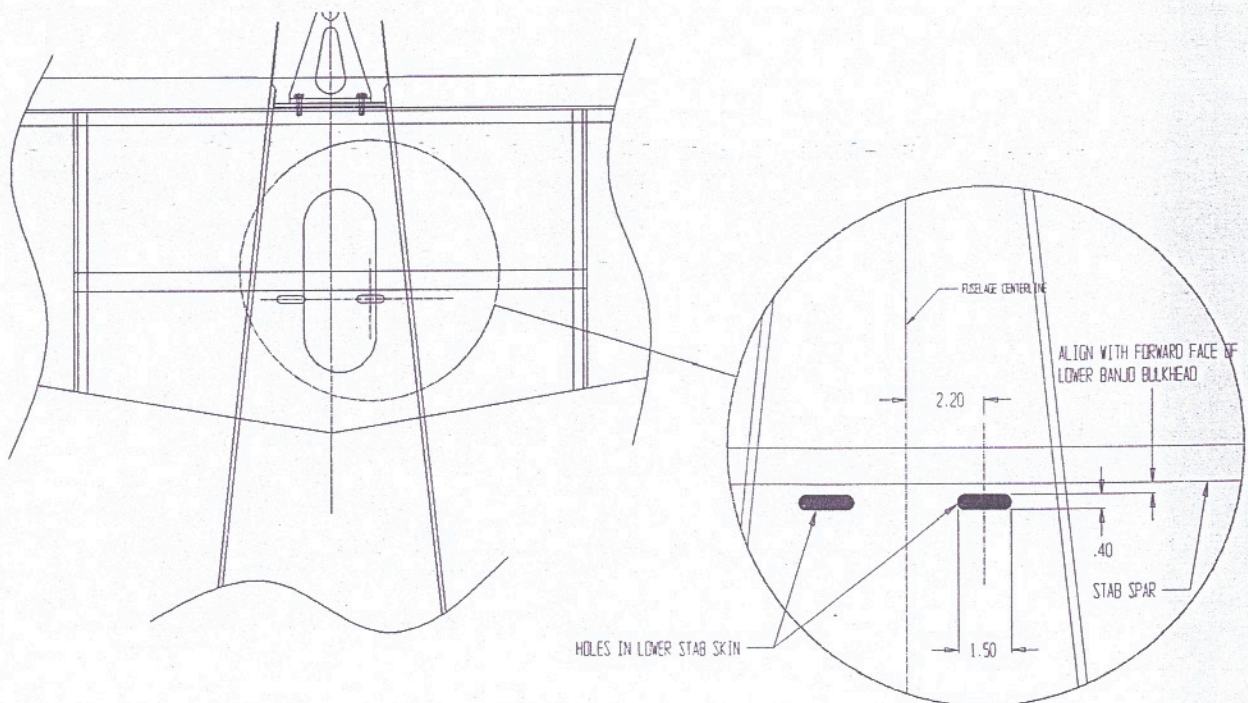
Top view of stabilizer showing position of holes in lower stabilizer skin for the attachment fittings.
